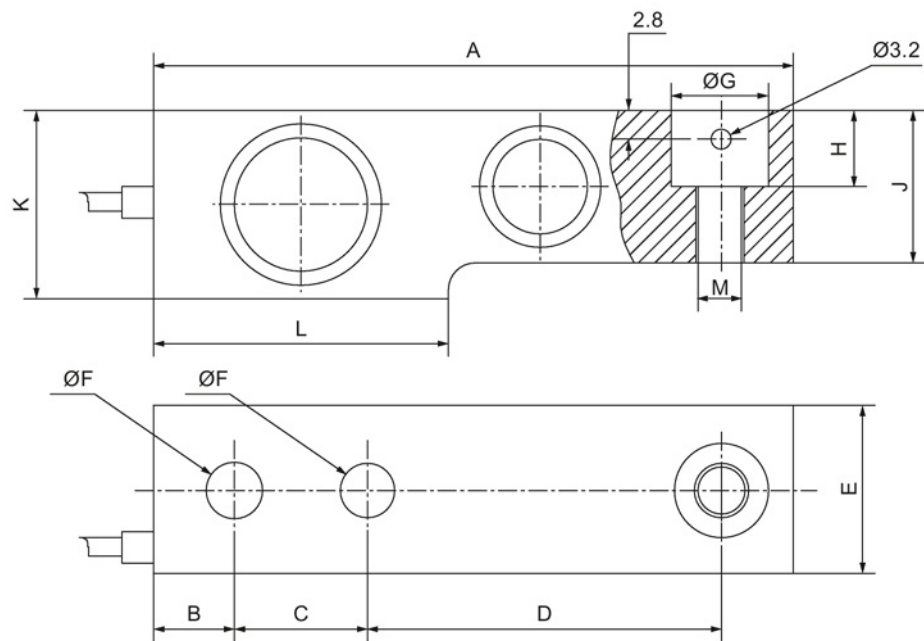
SIWAREX WL230 SB-S SA dimension drawing
